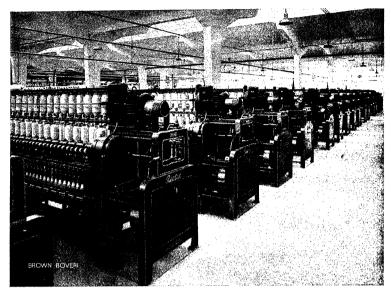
Step-pulley drive of ring spinning frames by means of squirrel-cage motors with external fan cooling.
